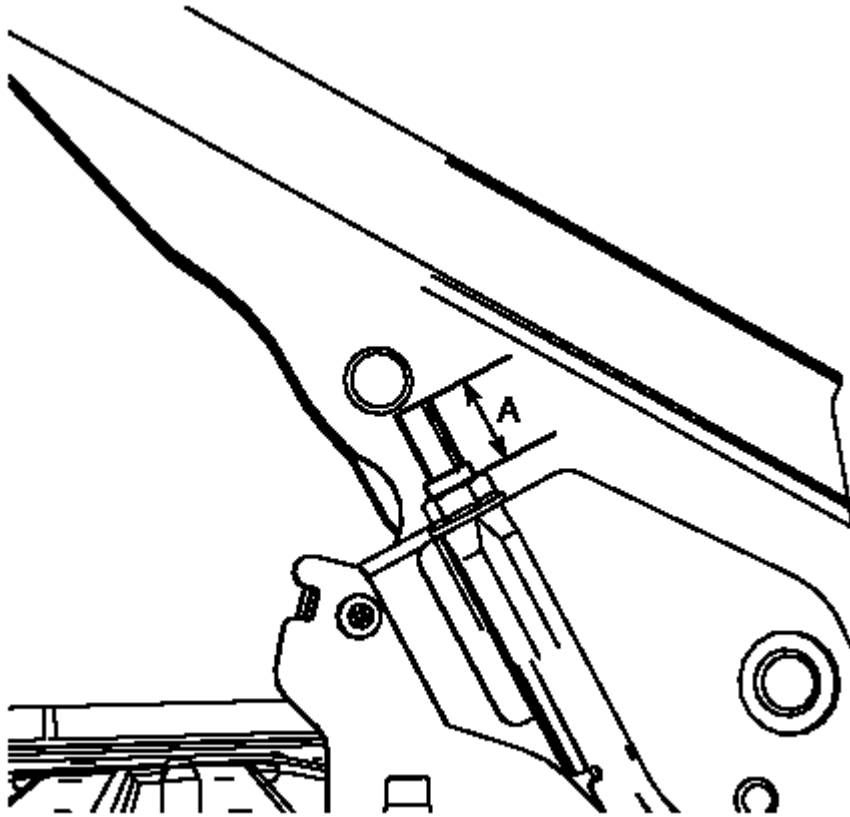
Installing Park Brake Cable Adjusting Nut Until Projection Amount (A)
